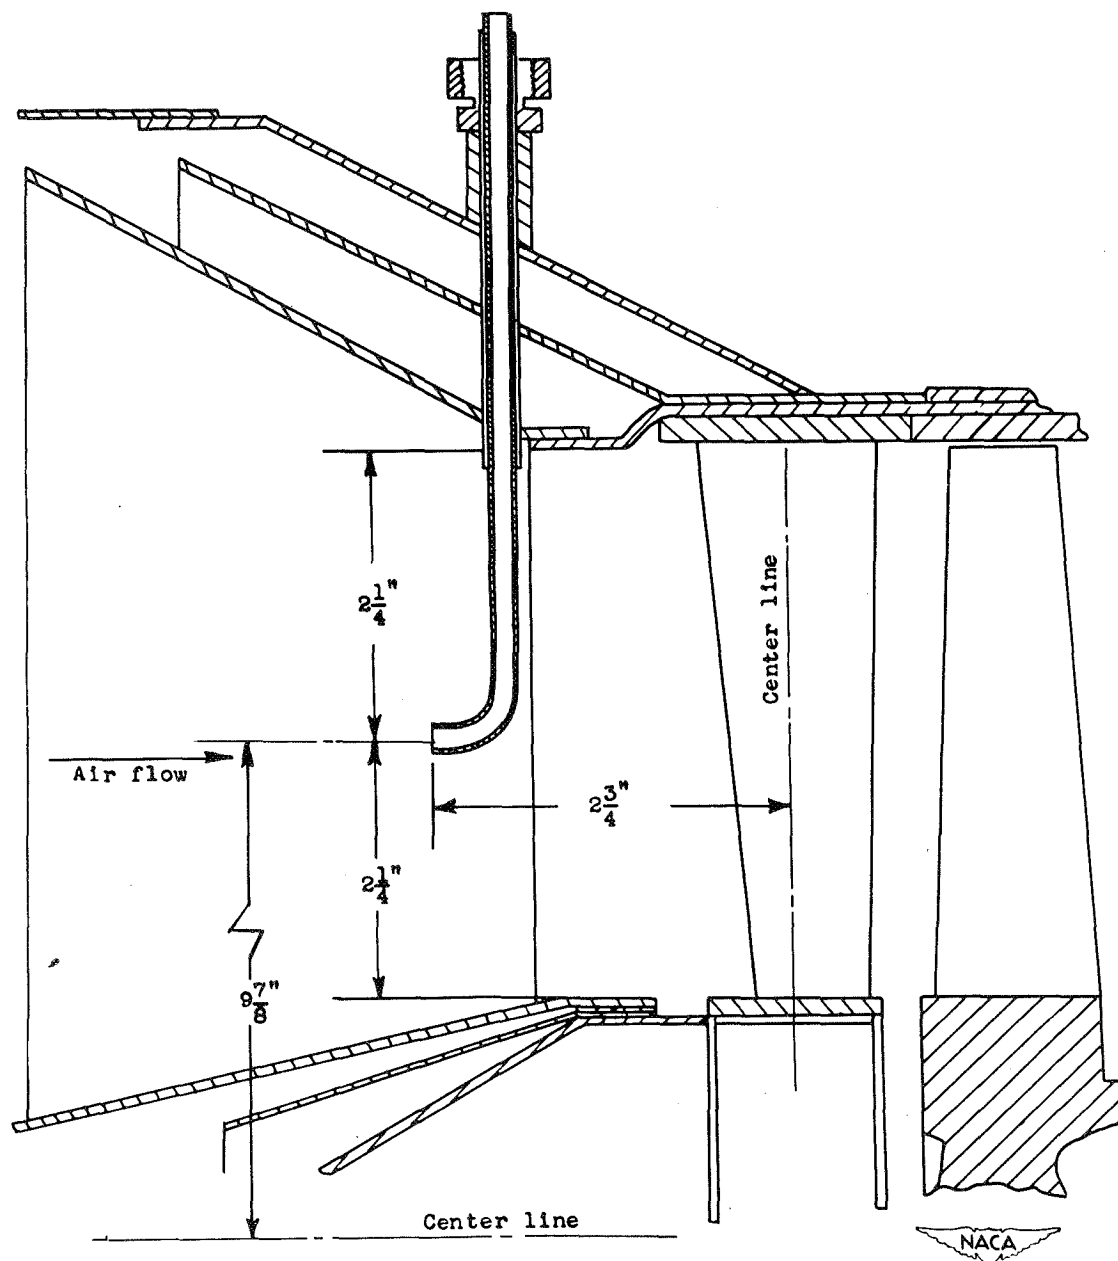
Concluded. Instrumentation at compressor outlet, station 4, $3\frac{13}{16}$ inches behind trailing edge of compressor-outlet straightening vanes.
